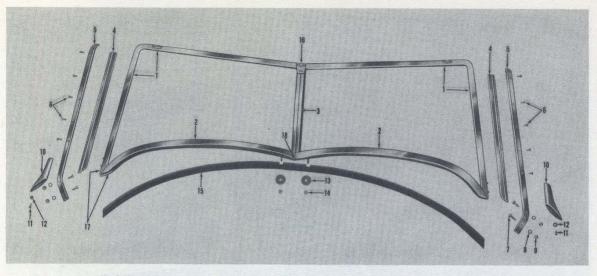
A-Windshield Assembly with Attaching Parts Removed.
